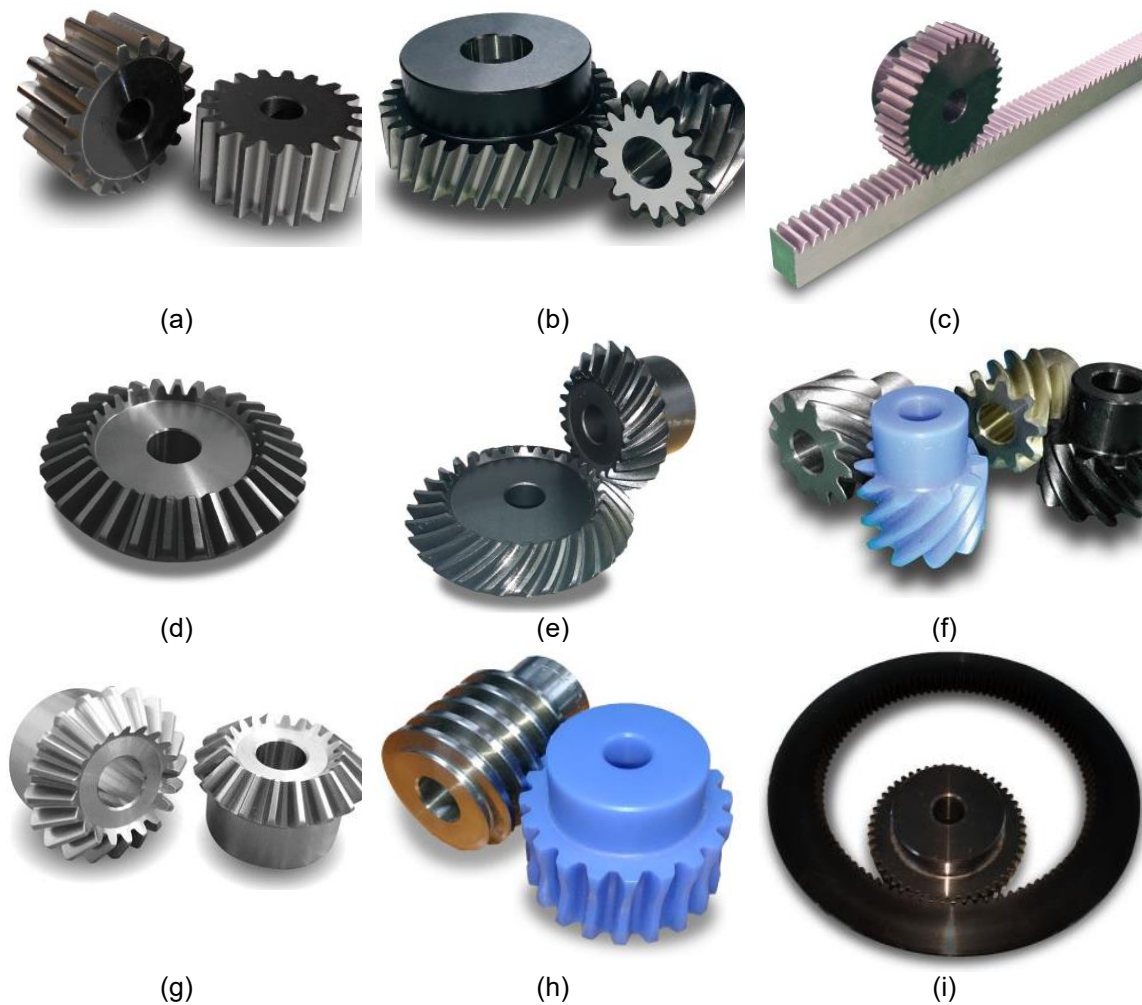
Different types of mechanical gears, (a) Spur gear, (b) Helical gear, (c) Gear rack, (d) Bevel gear, (e) Spiral bevel gear, (f) Screw gear, (g) Miter gear, (h), Worm gear, and (i) Internal gear [2].
